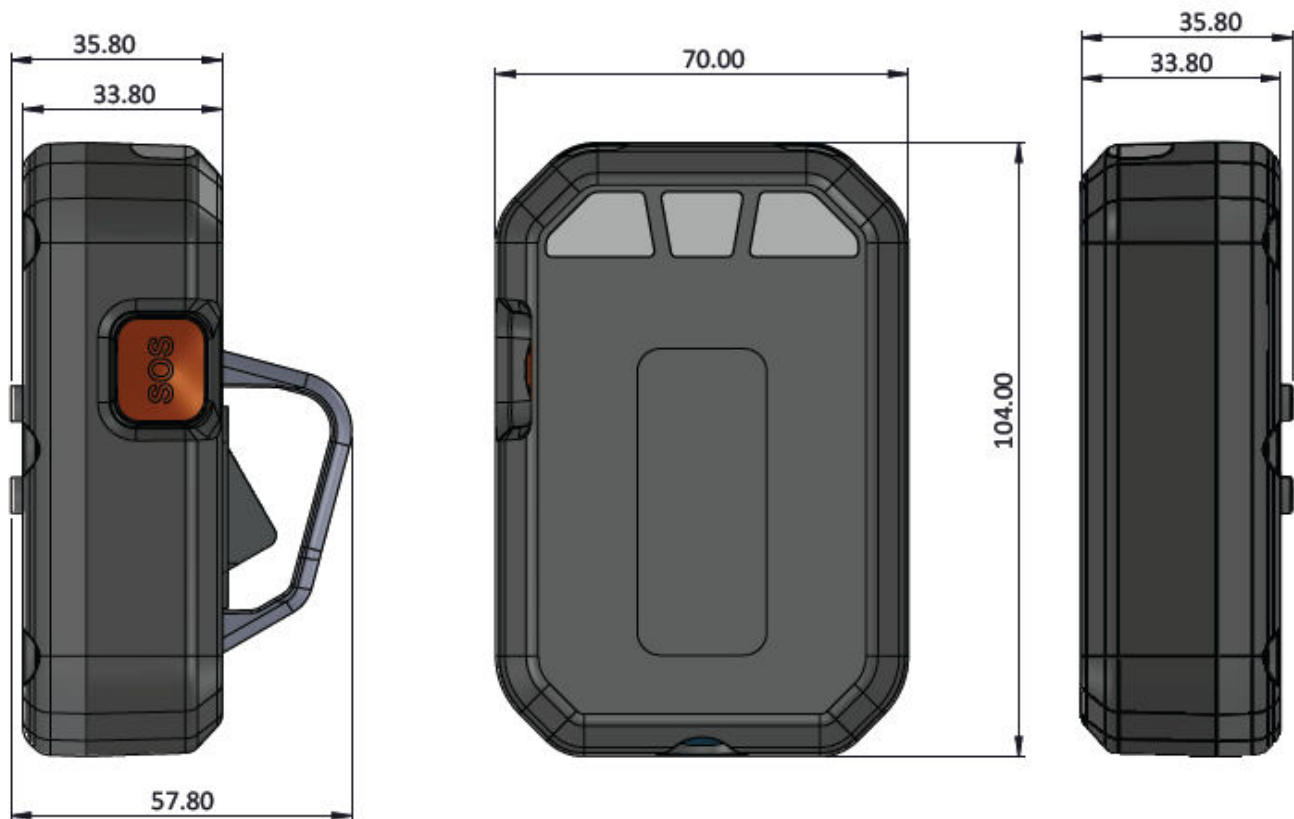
SEAL Ex Wearable GPS Tracker External Dimensions
